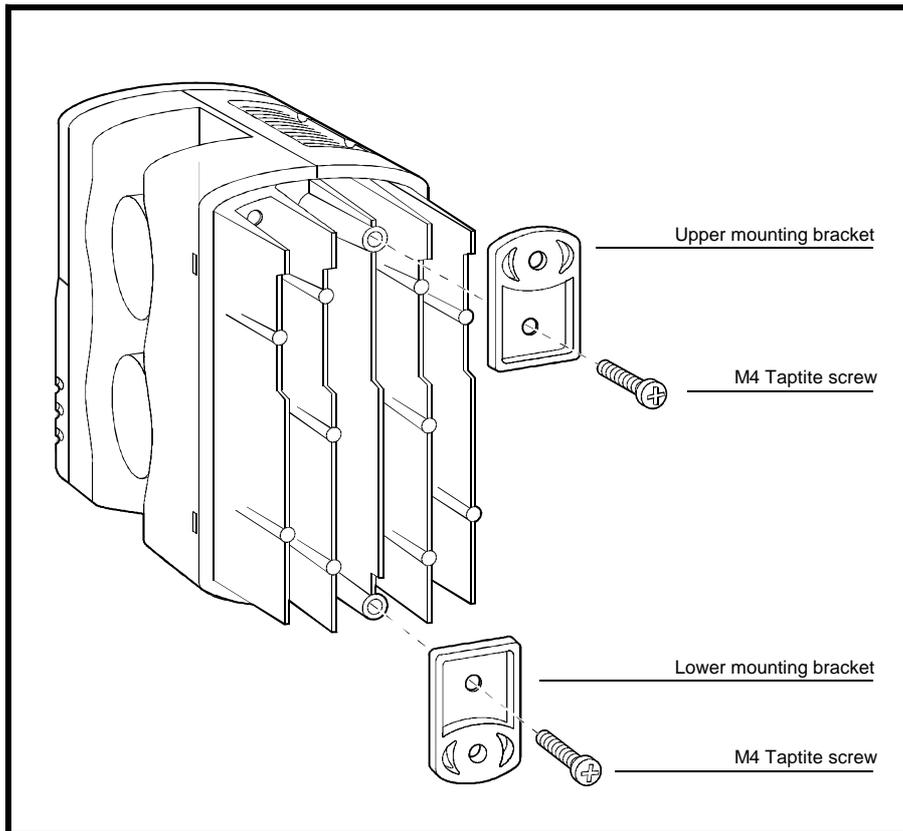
Fitting the brackets to the heatsink in preparation for panel mounting
